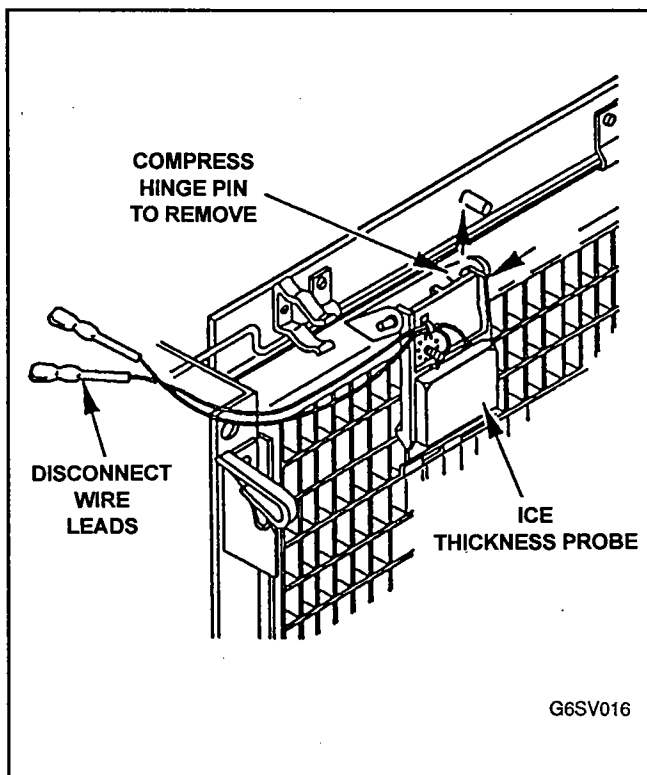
ICE THICKNESS PROBE REMOVAL
